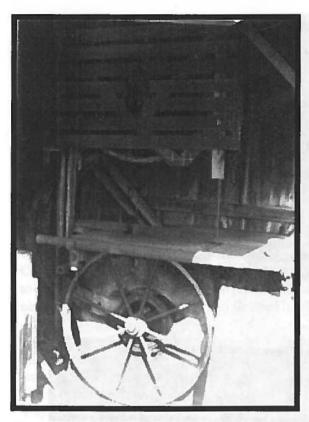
Bandsaw used to cut long timbers such as planking and beams.
